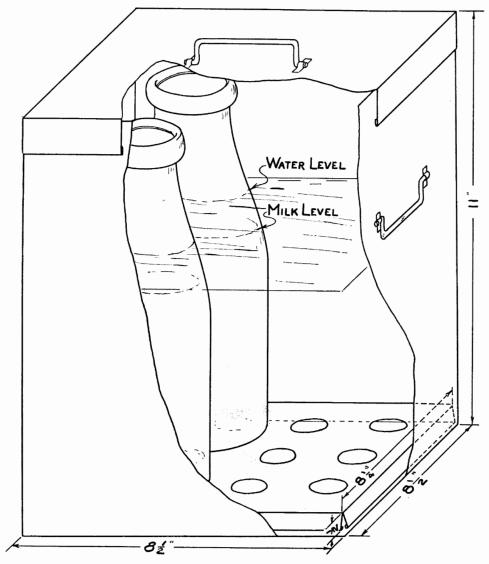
A cut-away and dimension drawing of the culture milk sterilizer shown in Figure 2.
